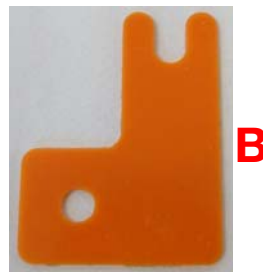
8. Part No. 29-1300 0.030" thick Shim for front or back mount Dial Wheel Installation
